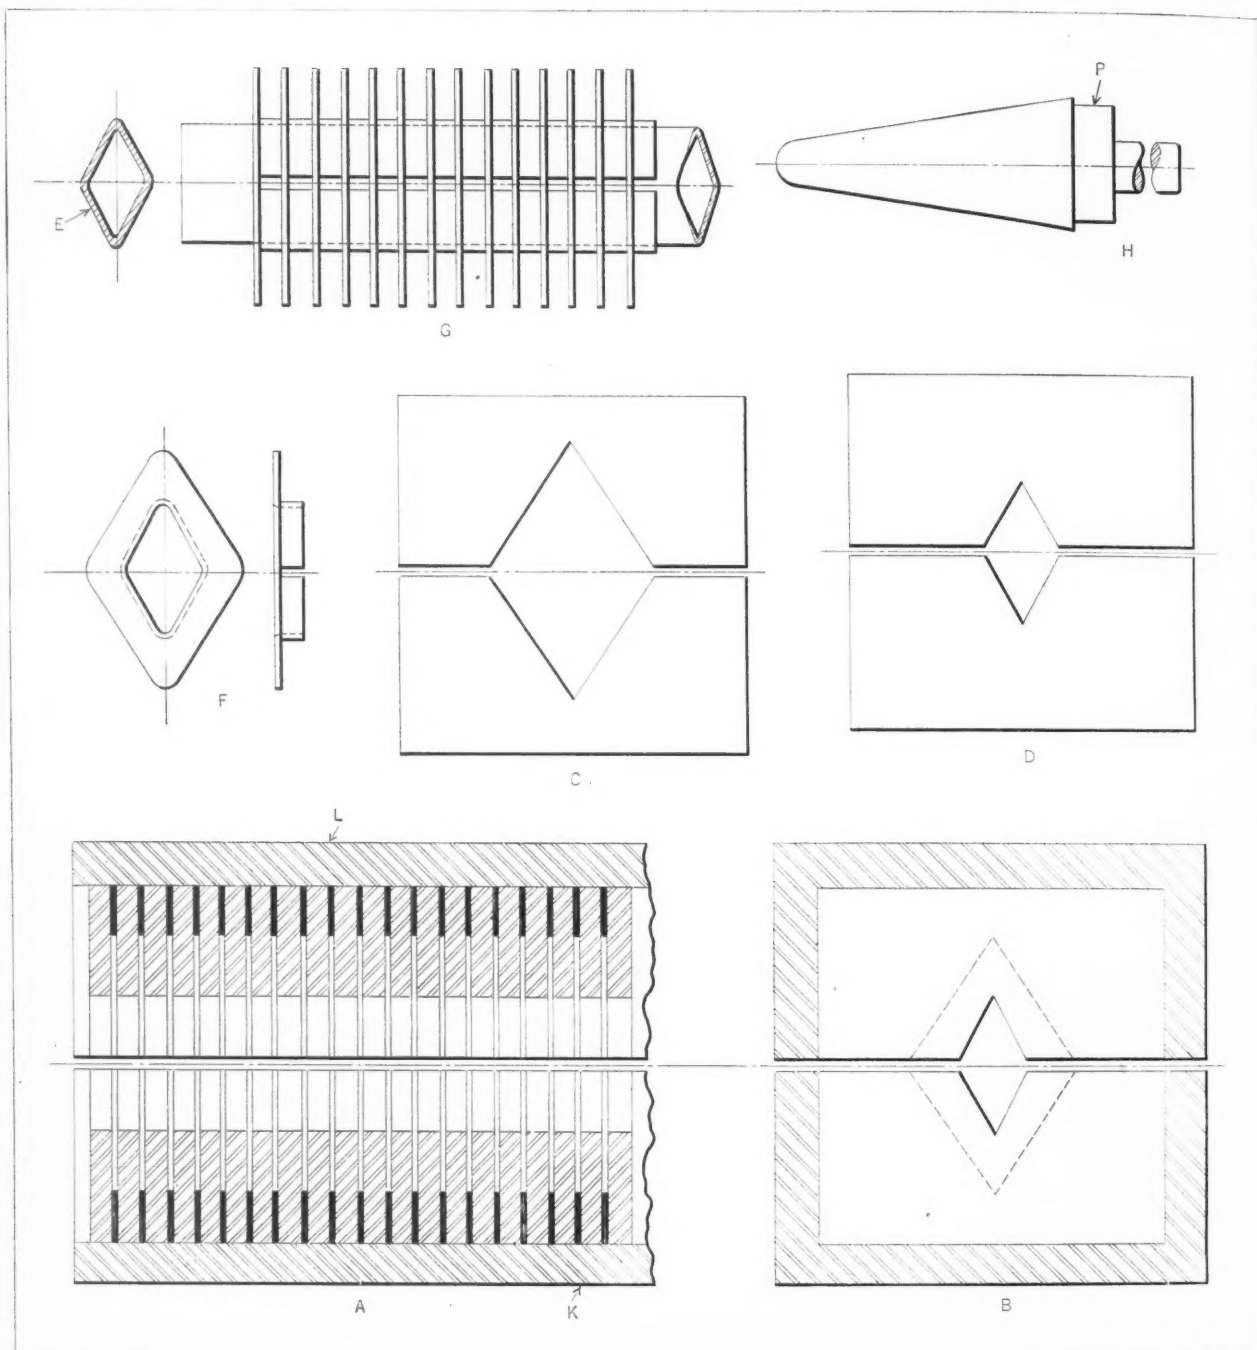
Assembled Tube, and Details of Machine Shown in Fig. 1
